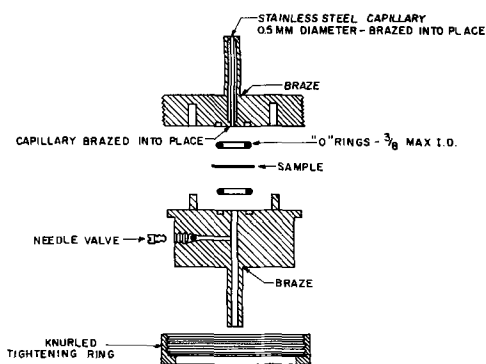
Cross-sectional view of film holder for permeability measurement.
